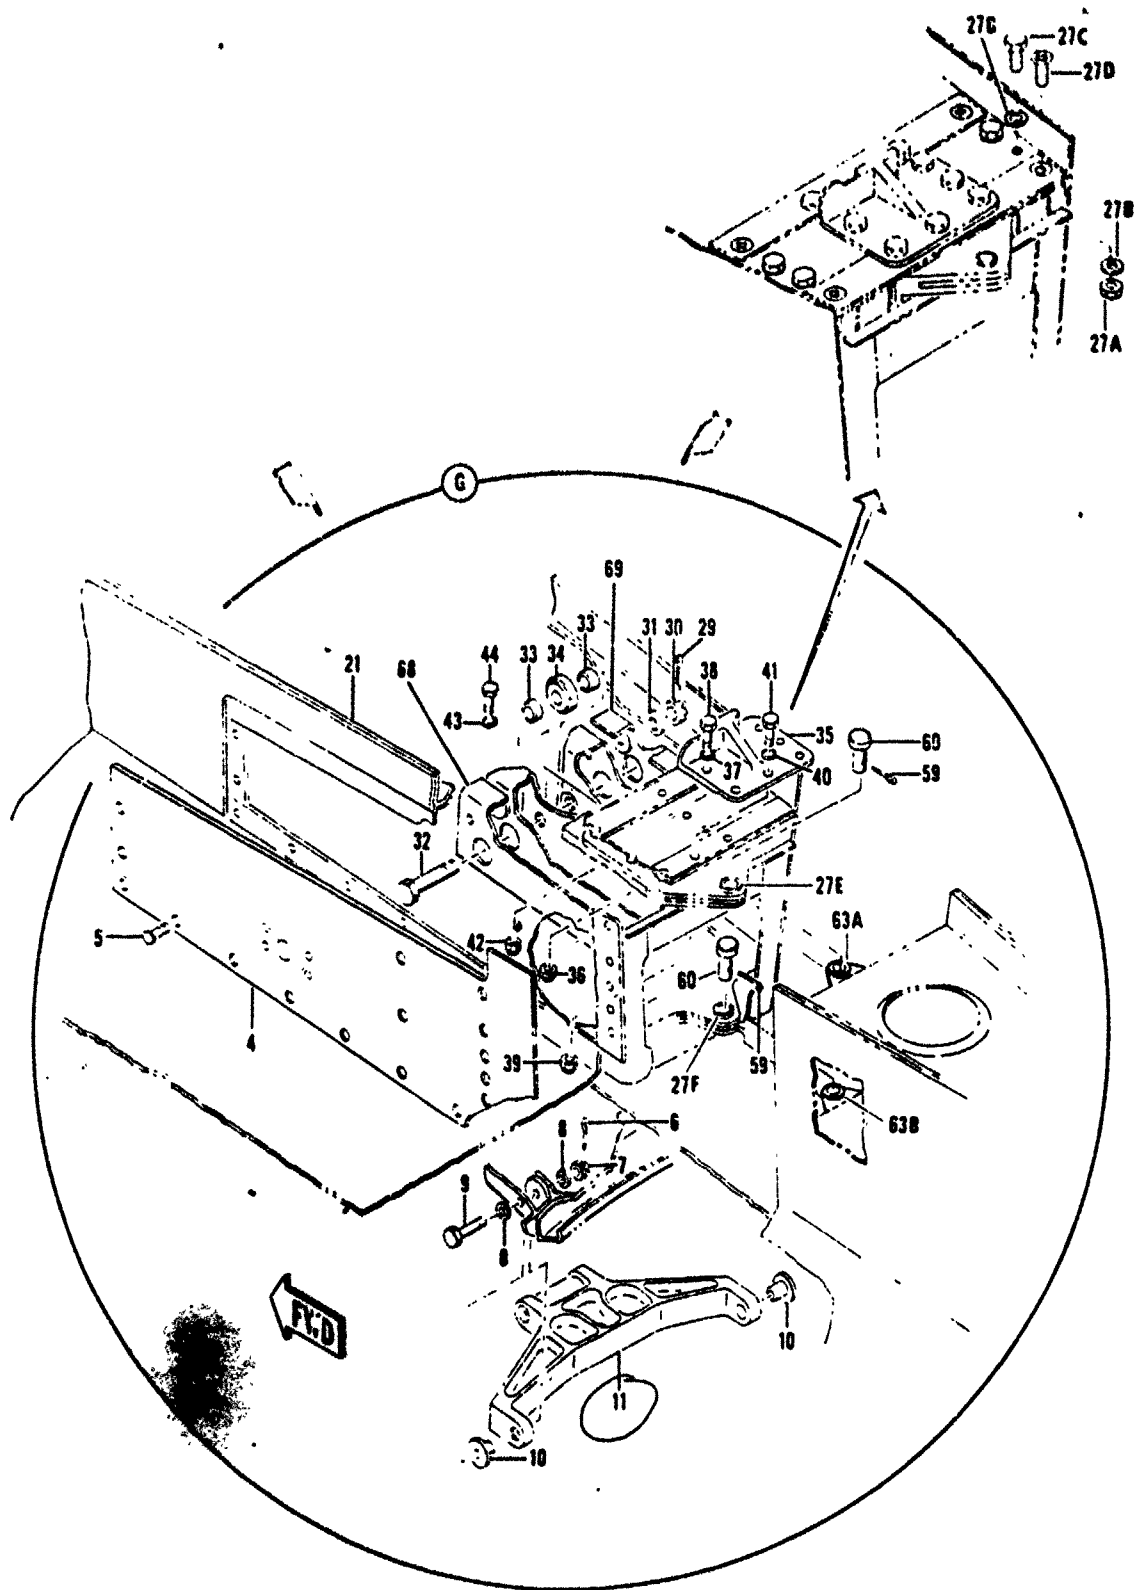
Aft Thrust Reverser and Sleeve Assembly (Sheet 3 of 3)
